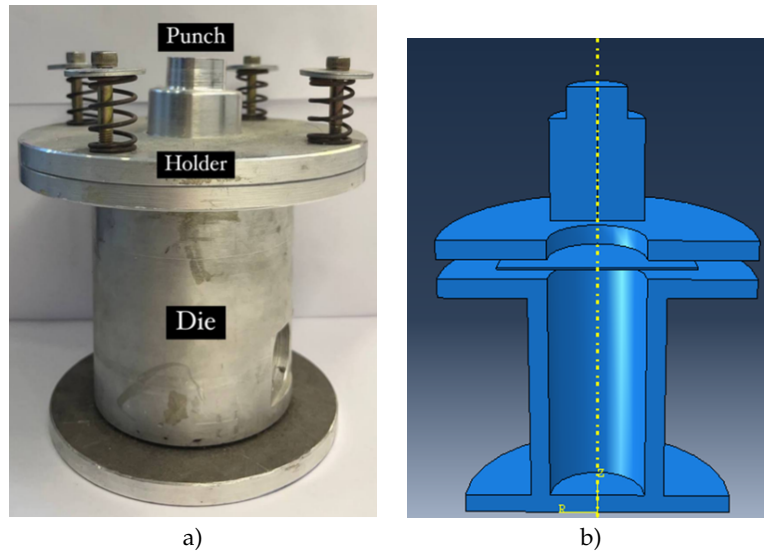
a) Forming die; b) Cross-section of a forming die with a sheet sample.
